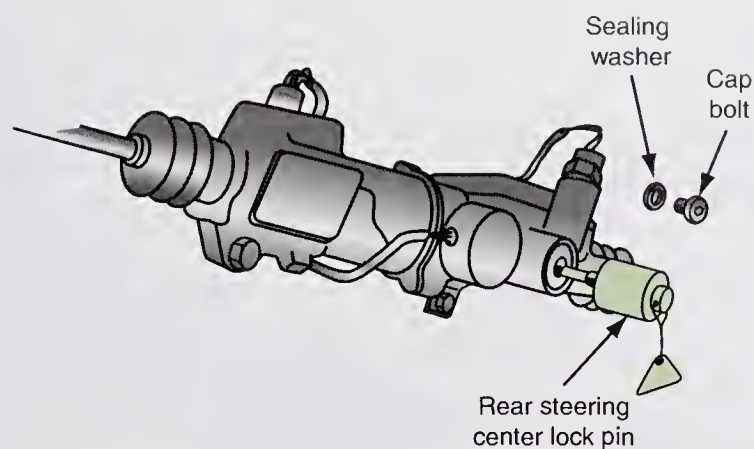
Removing the cap bolt and washer, and installing the rear steering center lock pin.
